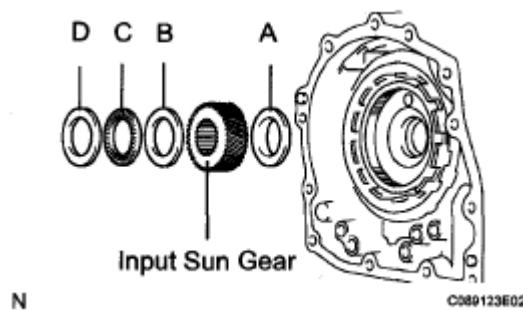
Identifying Thrust Bearings, Bearing Race And Input Sun Gear
